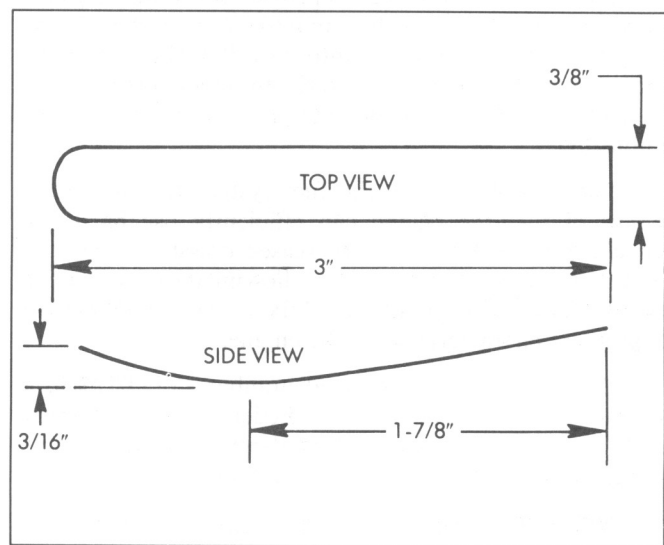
Rework of .017" and .004" Feeler Gage Stock
